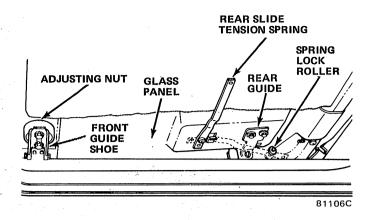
L-14 Front Guide Shoe and Rear Tension Spring
